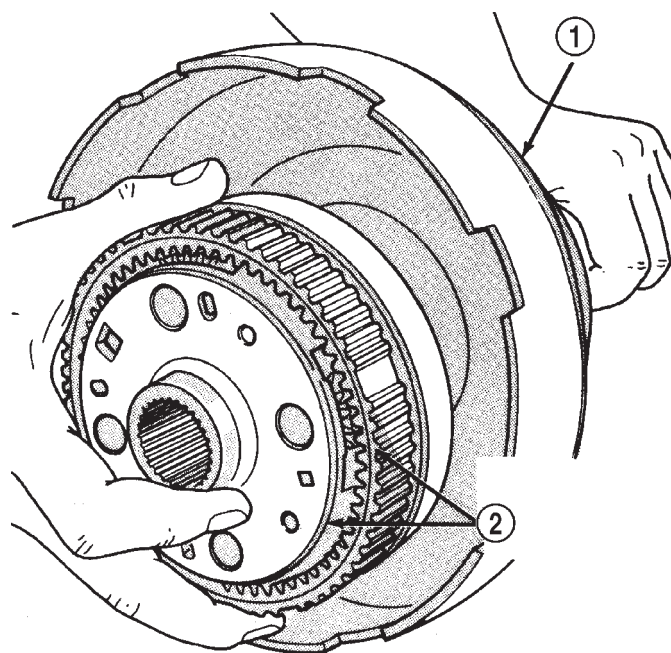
Installing Front Planetary And Annulus Gear Assembly
